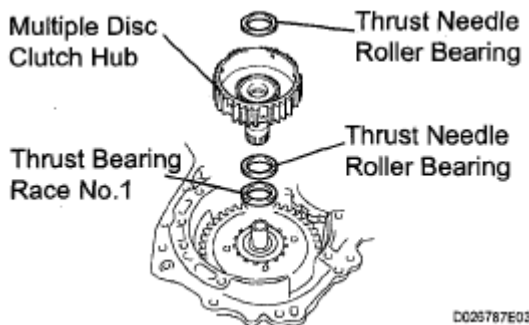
Identifying Thrust Needle Roller Bearing, Multiple Disc Clutch Hub And Thrust Bearing Race
